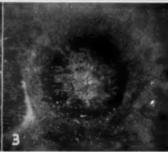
Cracked condition in spot weld of 0.045 in, thick duratumin sheet, Magnified 6 diameters. Strength "as welded," 674 lb.
